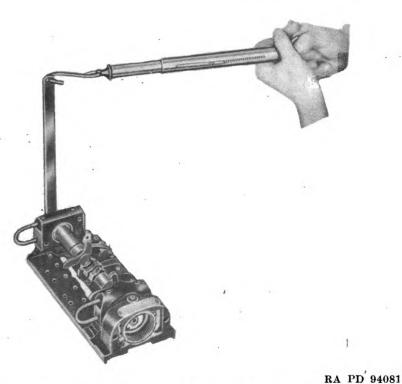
20-mm right-hand feed mechanism M3—Static torque test.
